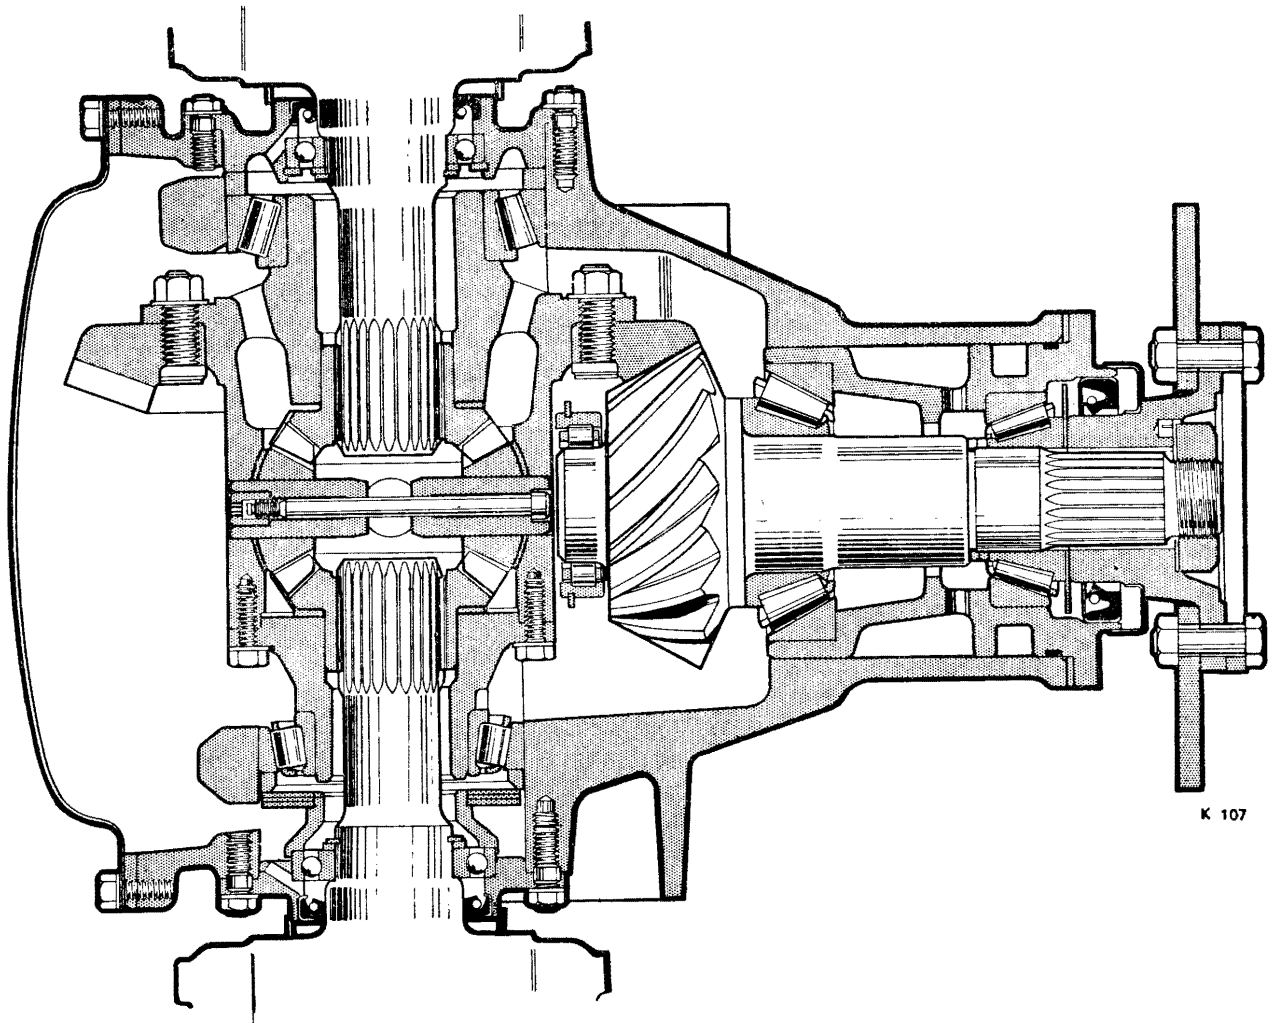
CROSS-SECTION—FINAL DRIVE UNIT
